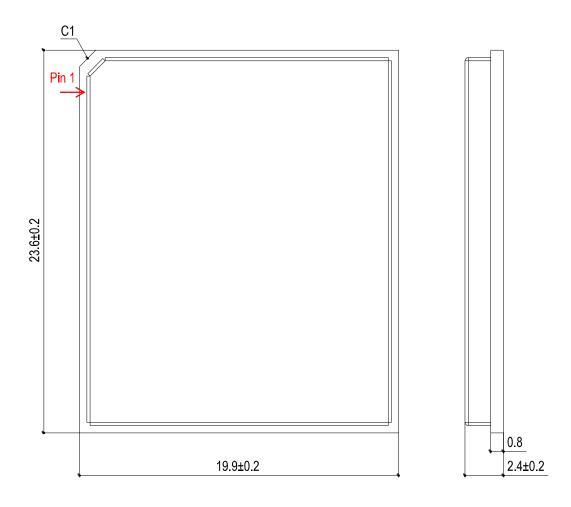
EG915Q Series Top and Side Dimensions (Unit: mm)
